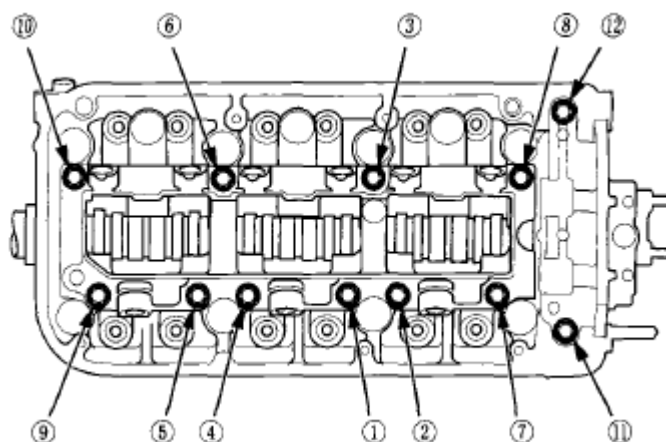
Identifying Bolts Tightening Sequence - Rear
